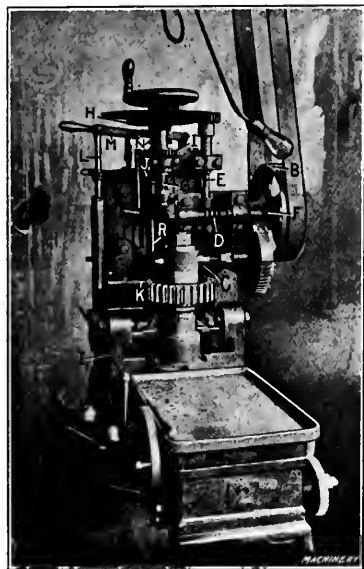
Old Freeland Hand-operated Gear-cutting Machine, converted into an Automatic Gear-cutter
